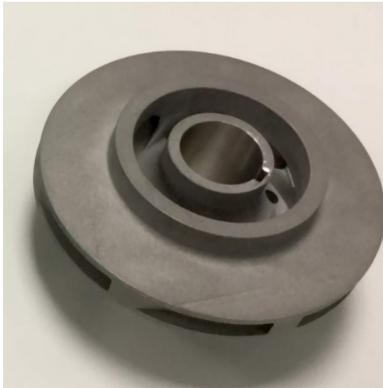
Water pump impeller produced by Siemens for the Krško NPP [68].
